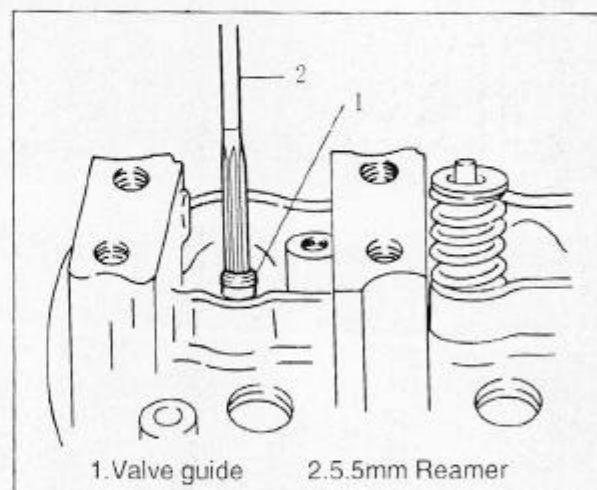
A — 67 MODIFICATION OF VALVE GUIDE
